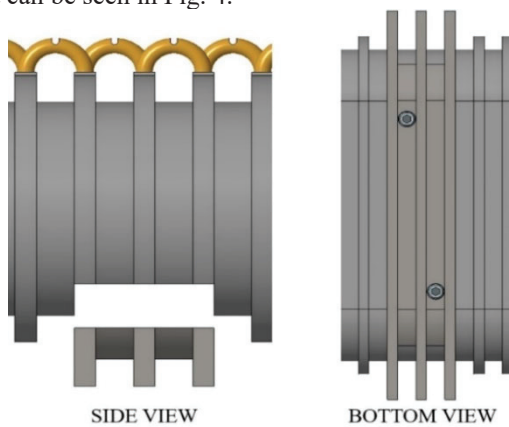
Side and bottom view of the footed pole insert and its 4-40 fasteners.
